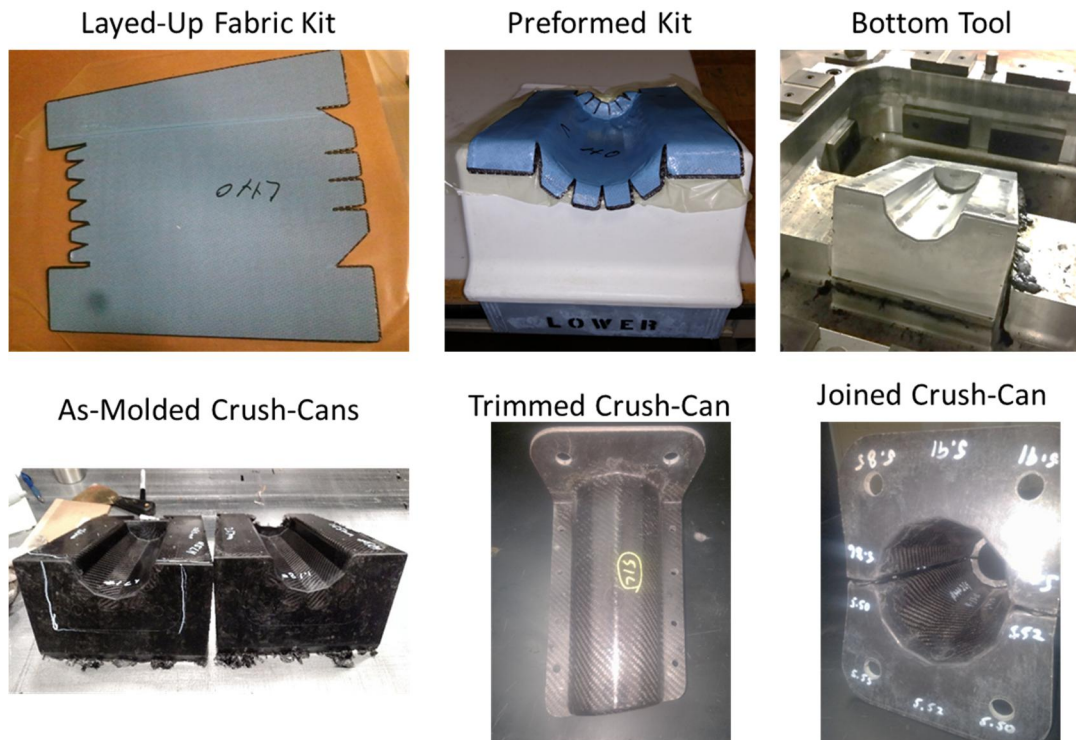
Manufacture of a thermoset crush-can from preforming to joining.
